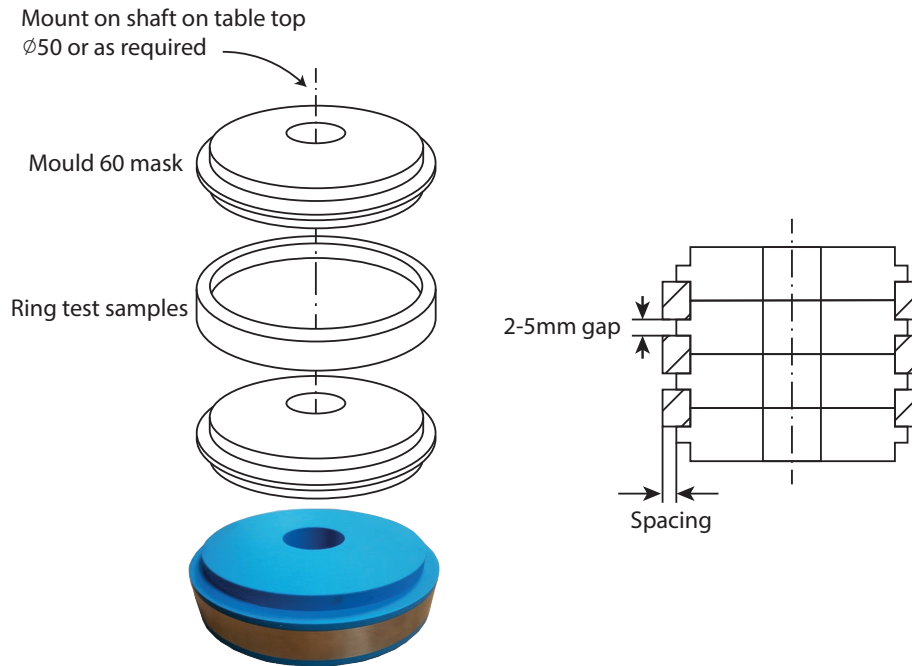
Spraying tooling designed for fitting a 173 mm ID samples. Figure includes a individual unit and its assembly. Manufacturer: Gerard Poly Mouldings
